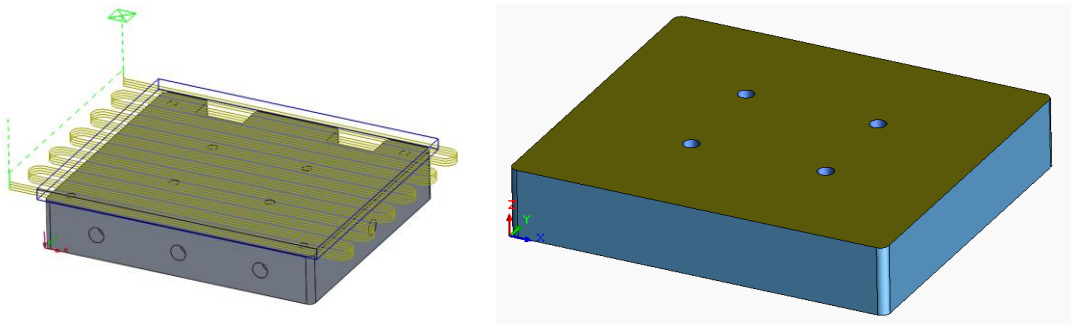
Machining Bottom surface (a) tool path (b) machined result
